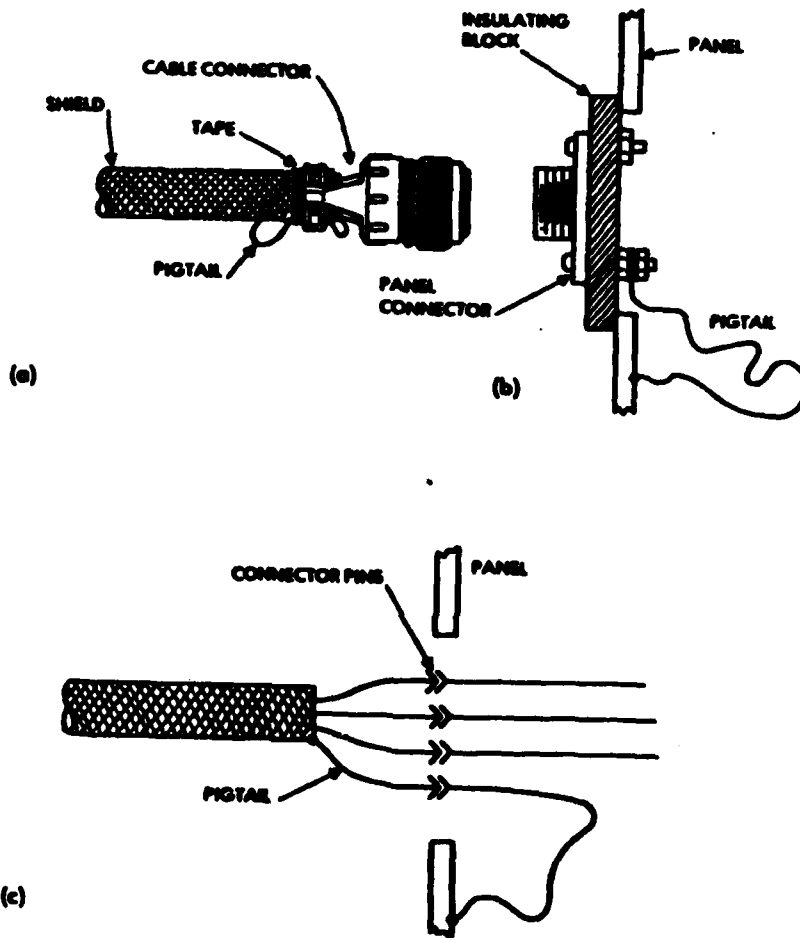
Typical Connection of Connector to Backplane via Pigtails
